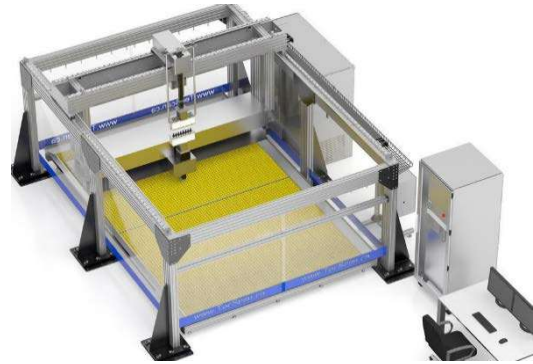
Machine ultrasonic inspection of surface for aeronautics (<https://goo.gl/7fV41g>)
